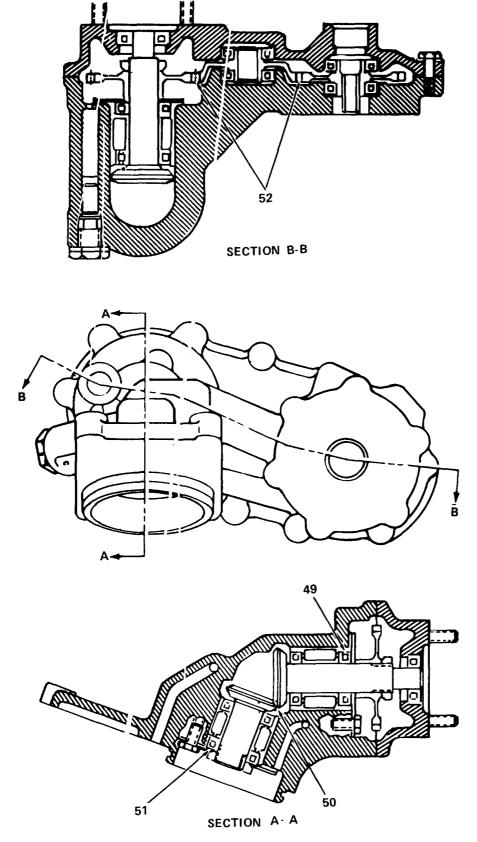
Fits, Clearances and Backlashes (T53-L-13B/703 Engines) (Sheet 4 of 4)
